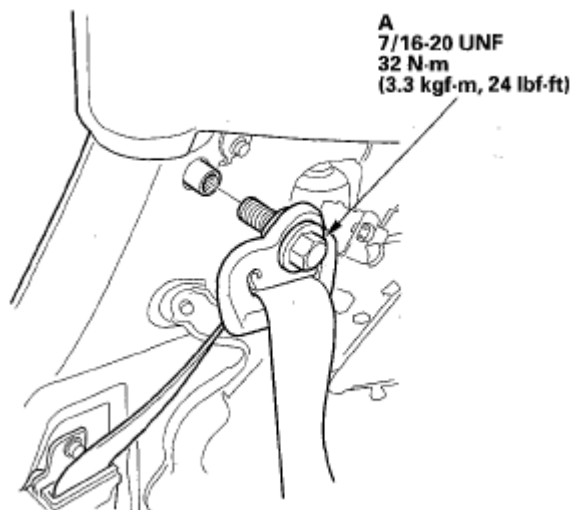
Identifying Upper Anchor Bolt Tightening Torque
